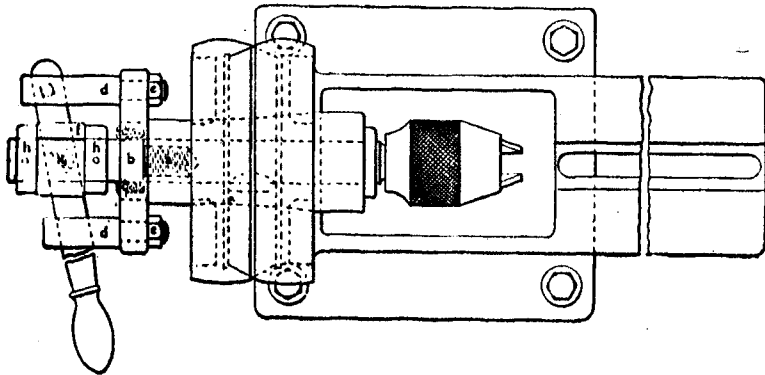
Lapping Machine for Plug and Ring Gages.
